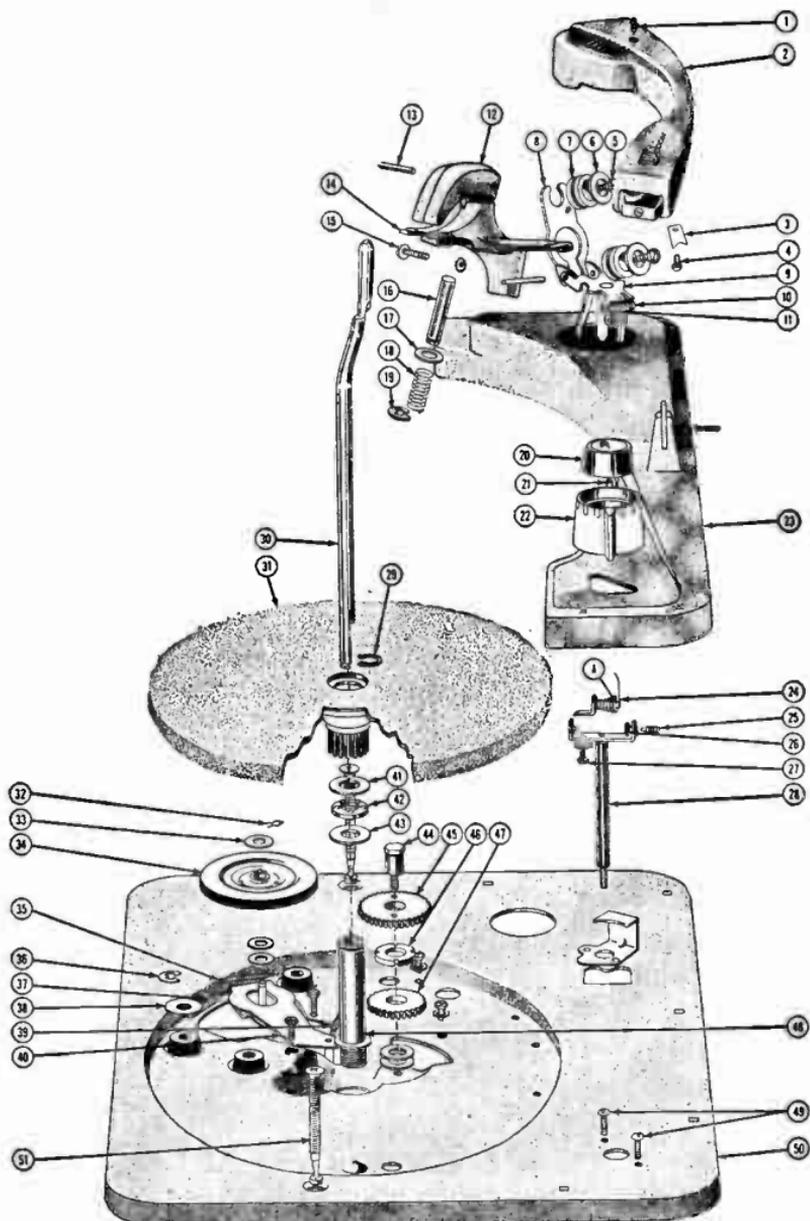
Exploded view of parts above baseplate in Webster automatic three-speed record changer.
